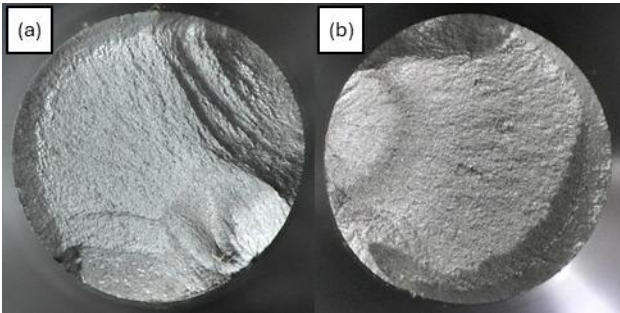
R=-1 forged plate 2009/SiC/15p axial fatigue fracture surfaces for coupons failing at (a) 5.7×10^4 cycles, and (b) 6.4×10^6 cycles.
